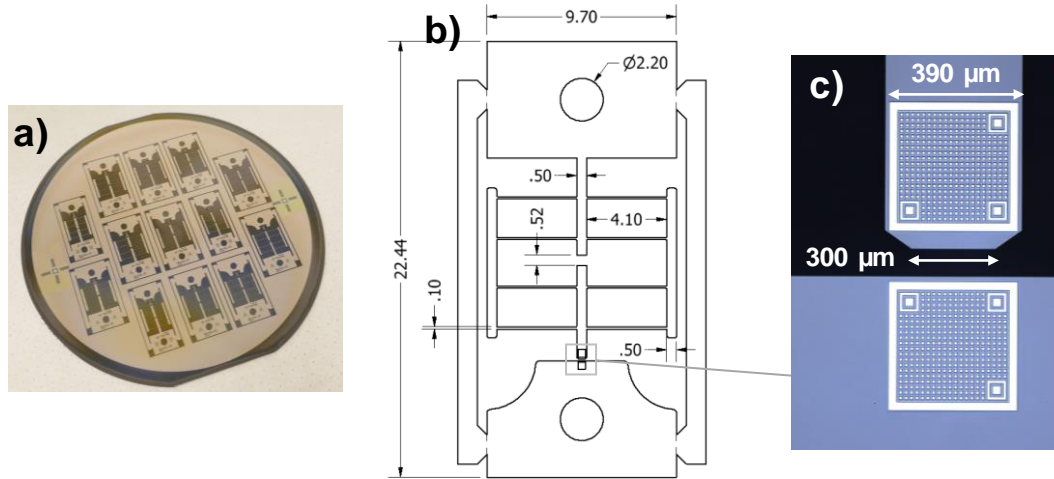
Micro-fabricated assembly for compact SFTCT setup: a) view of silicon wafer with microfabricated assemblies, b) single sensor platen assembly (sensor on top, platen on bottom) with breakable connecting joints, c) zoom on sensor and platen HP codes.
